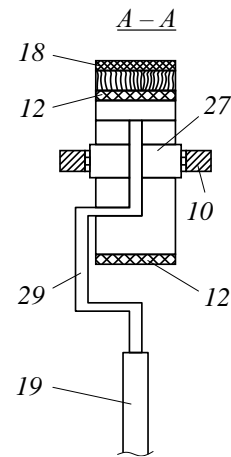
Scheme of the working position of the mechanisms of the conveying device and the processed material on the staking machine
